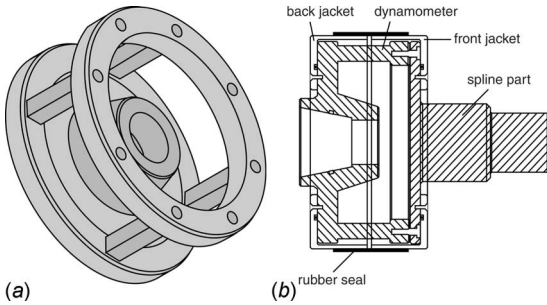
Drawing of dynamometer showing four posts (left) and cross section of dynamometer with spline part and sealing jackets
